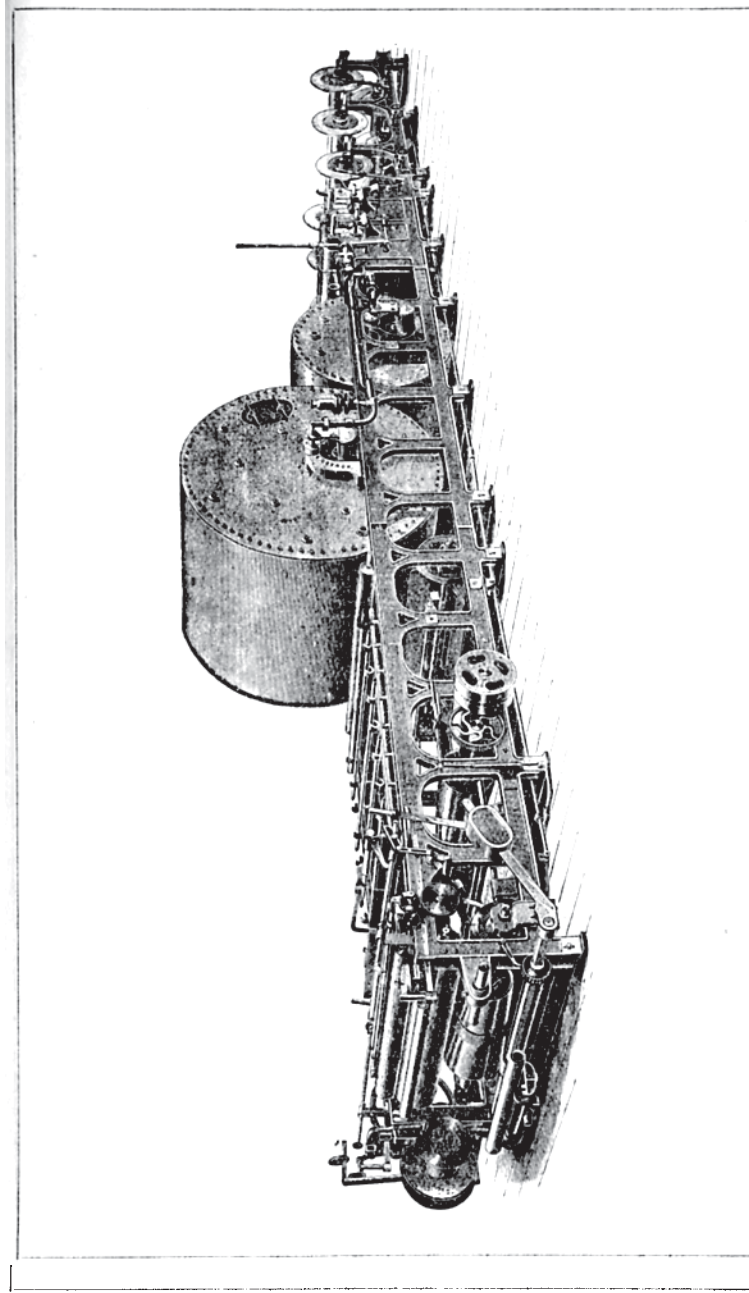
SLASHER OR TAPE-SIZING MACHINE.
